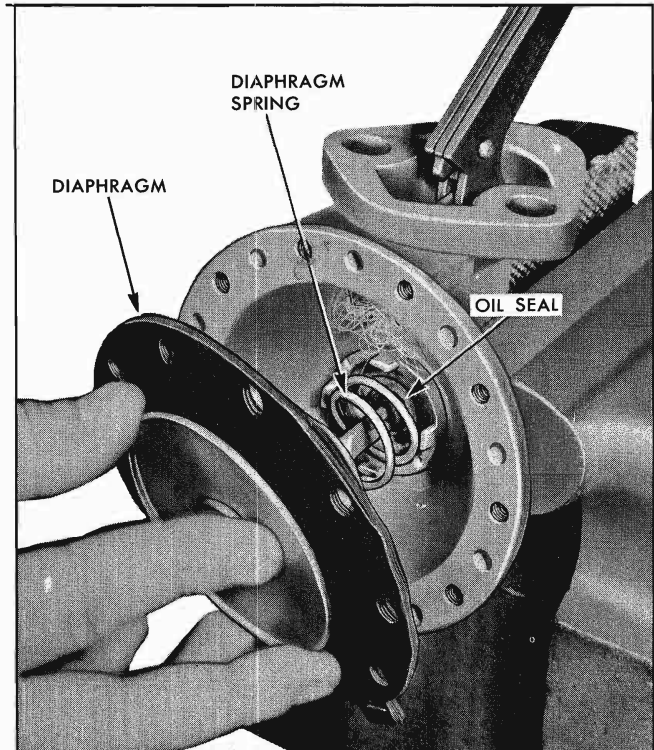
B-108 Sealing Diaphragm Spring in Seal Well
